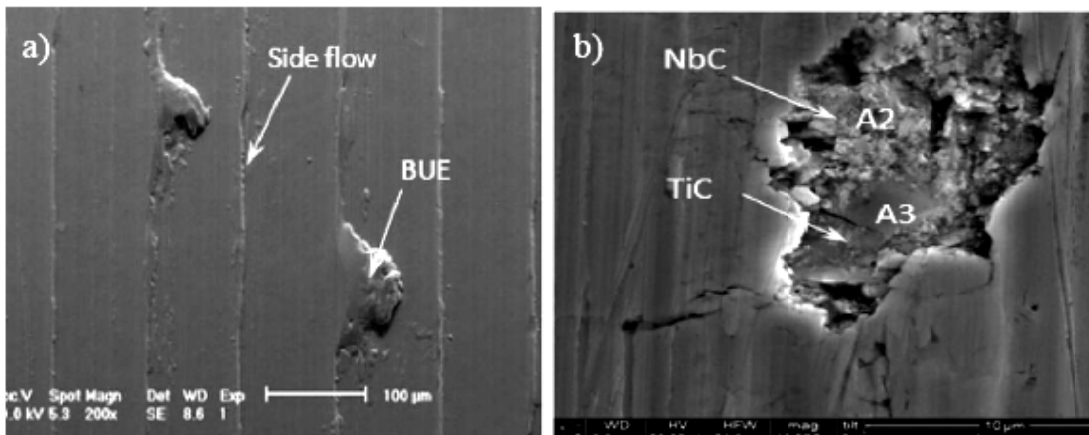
Typical surface damage (a) side flow and BUE (b) carbide cracking [78]
